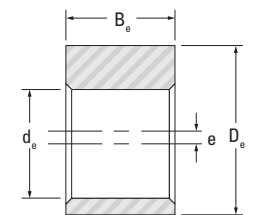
Eccentric bushing dimensions – metric series (except GCR, GCUR series)
